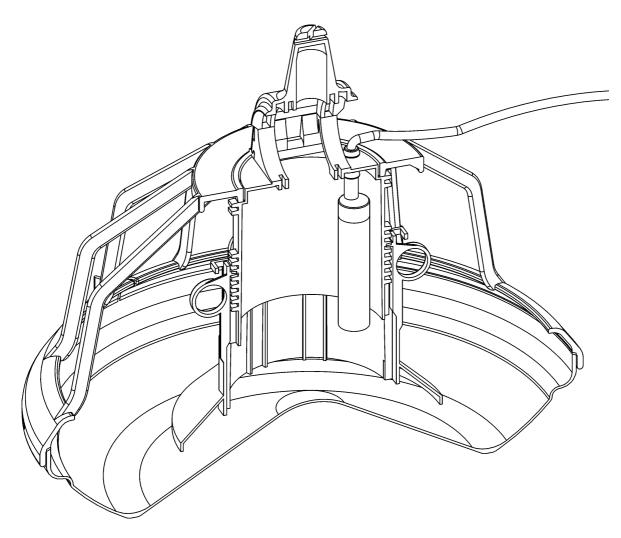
Cross section mounting of the sensorsAFS 01 for control BigPan 330; MultiPan 330 and MalePan 330
